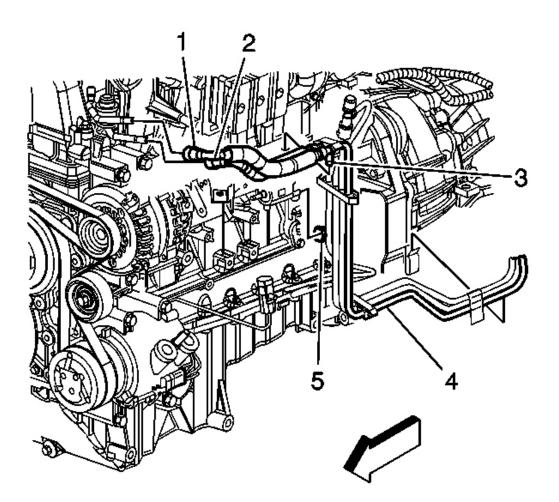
Fuel Feed And Fuel Return Pipes (Left Side Of Engine) Courtesy of GENERAL MOTORS CORP.
